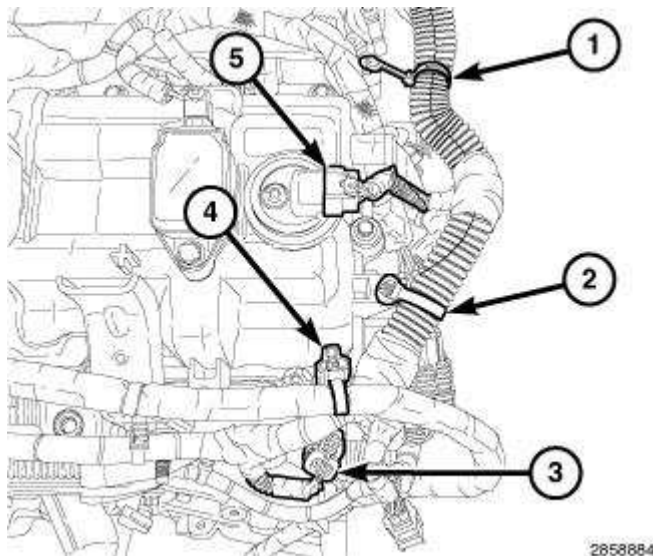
ECT Sensor Connector, CMP Sensor & Main Wire Harness Retainers
